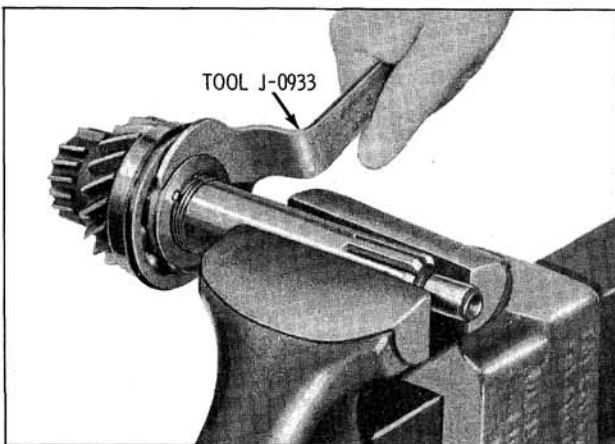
Removing Bearing Retainer Nut and Oil Slinger
